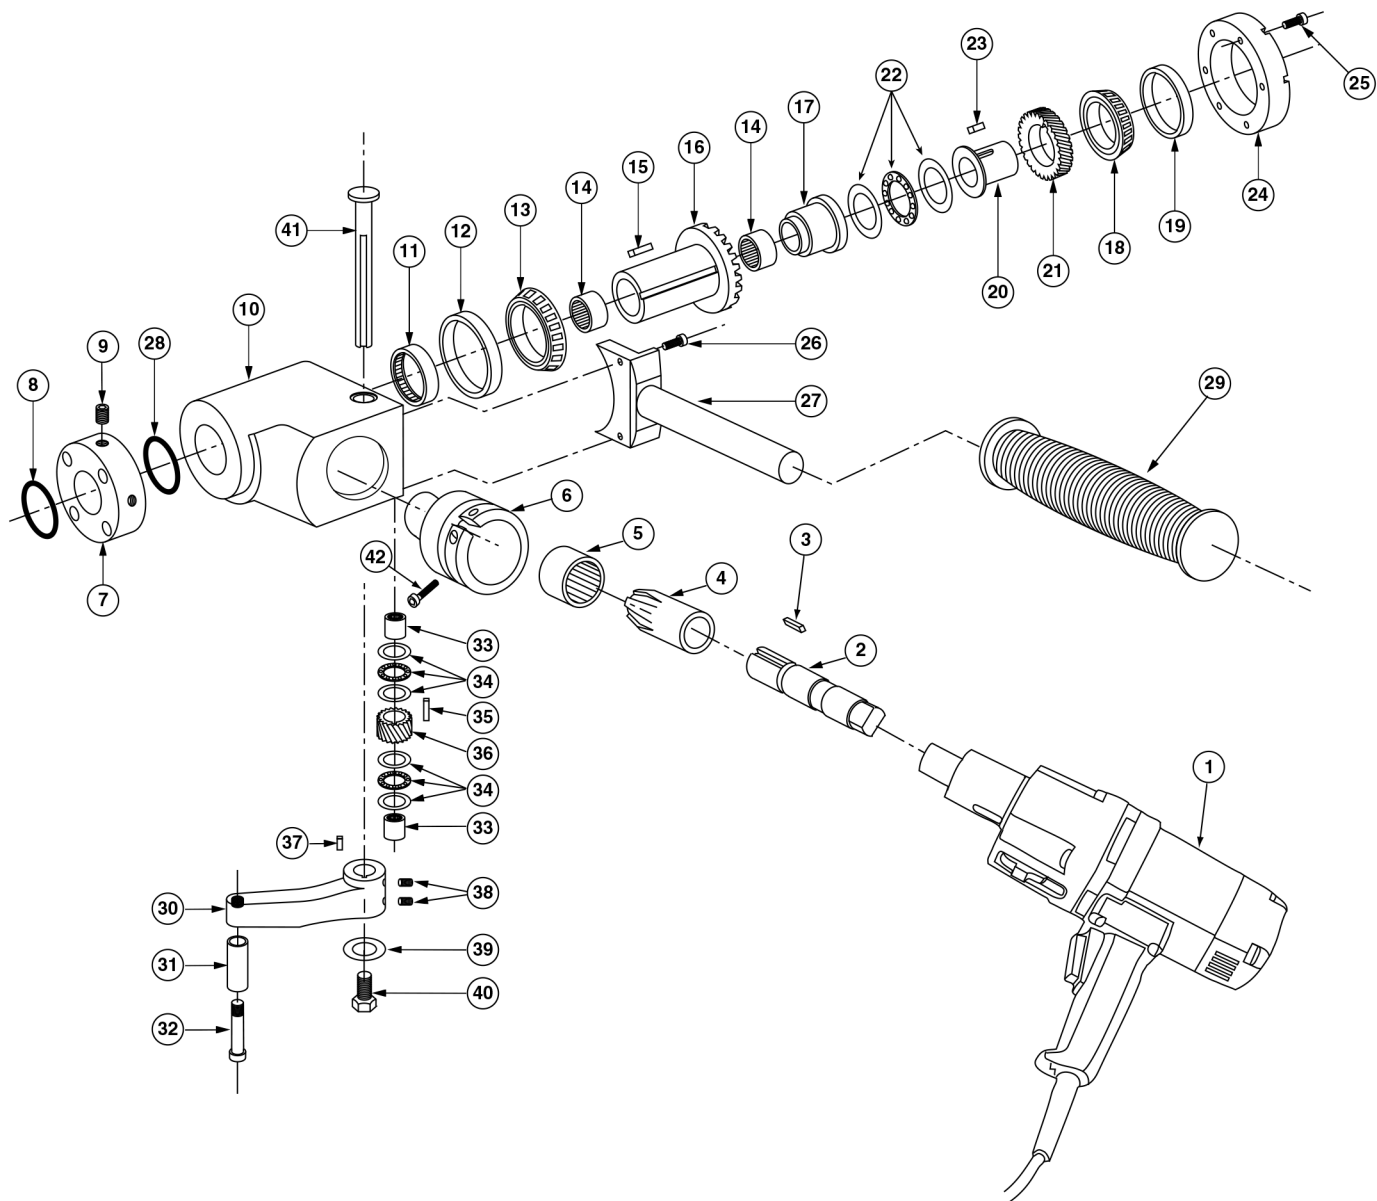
BG44 BOILER GUN - ELECTRIC, CRANK FEED ASSEMBLY (P/N BG44CR-E)
